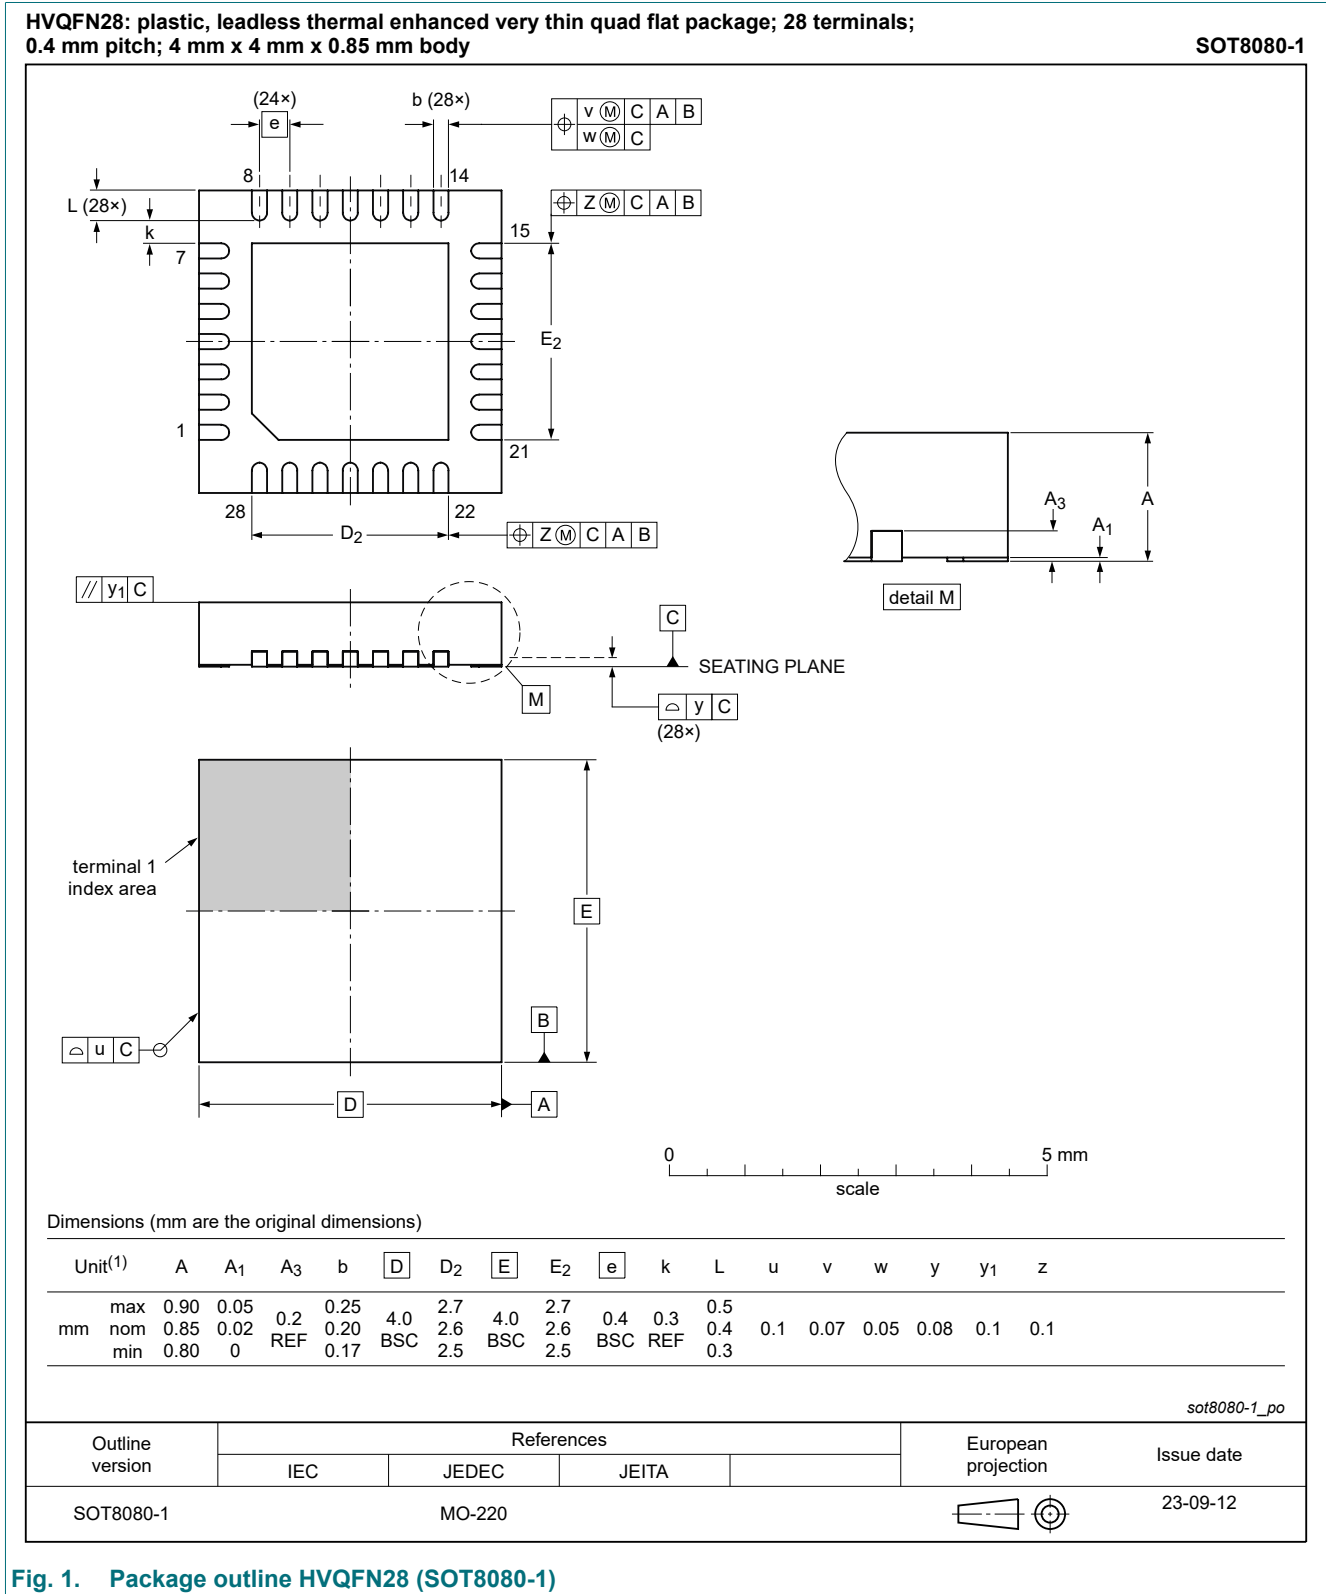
Package outline HVQFN28 (SOT8080-1)
